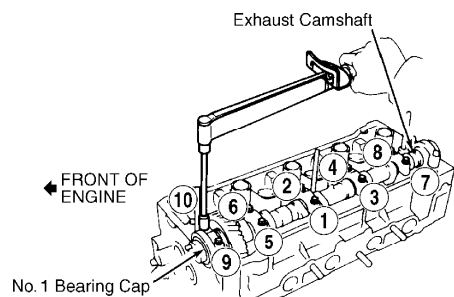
Camshaft Bearing Cap Bolt Tightening Sequence
